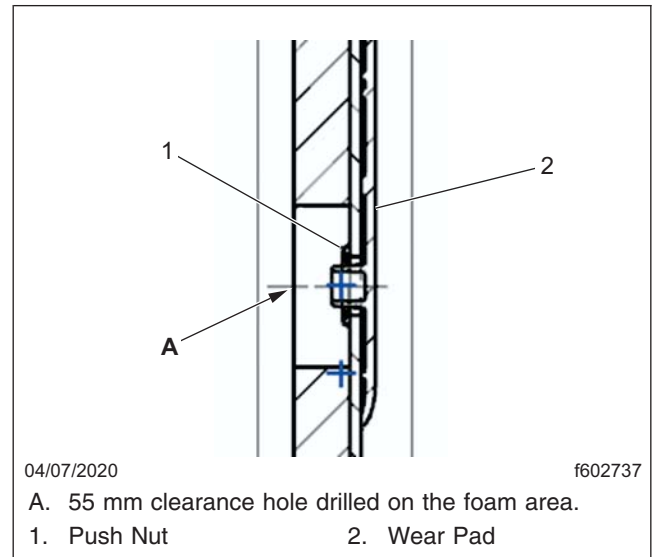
, Cross Sectional View of Wear Pad Push Nut Fit into the Floor Mat Hole
